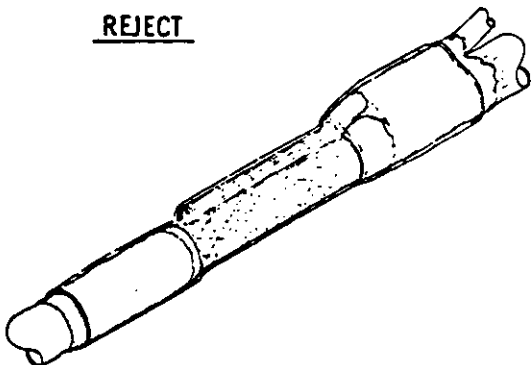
Heat shrinkable solder devices - shield terminations.
